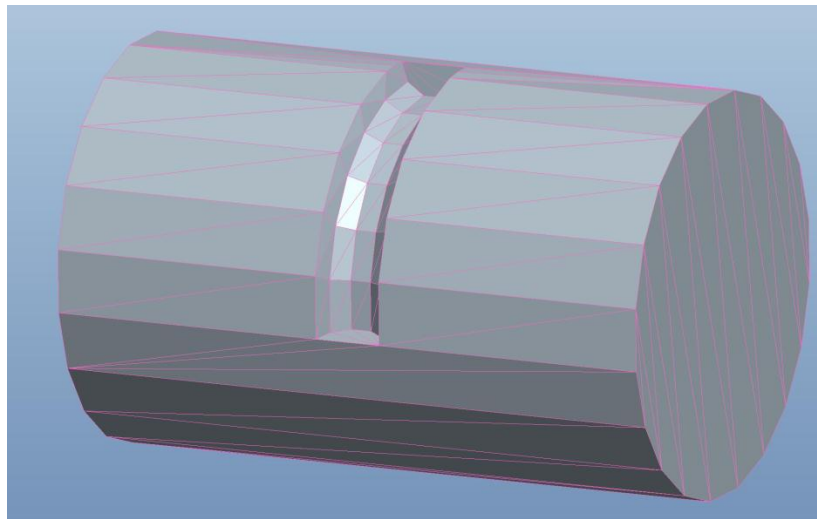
A CYLINDRICAL GEOMETRY WITH A POCKET
